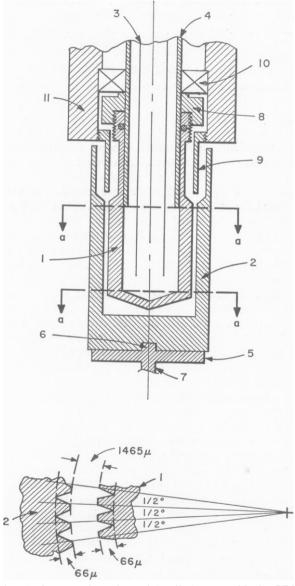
(above) Cross-section of coaxial cylinder assembly in GDM viscometer. (below) Detail of grooves in rotor and stator cylinders at section a a.
